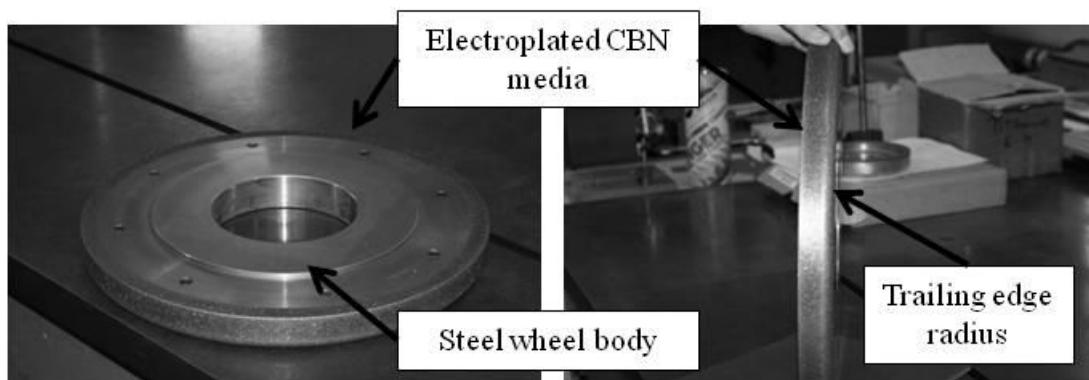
Photographs showing the typical cylindrical grinding wheels used
